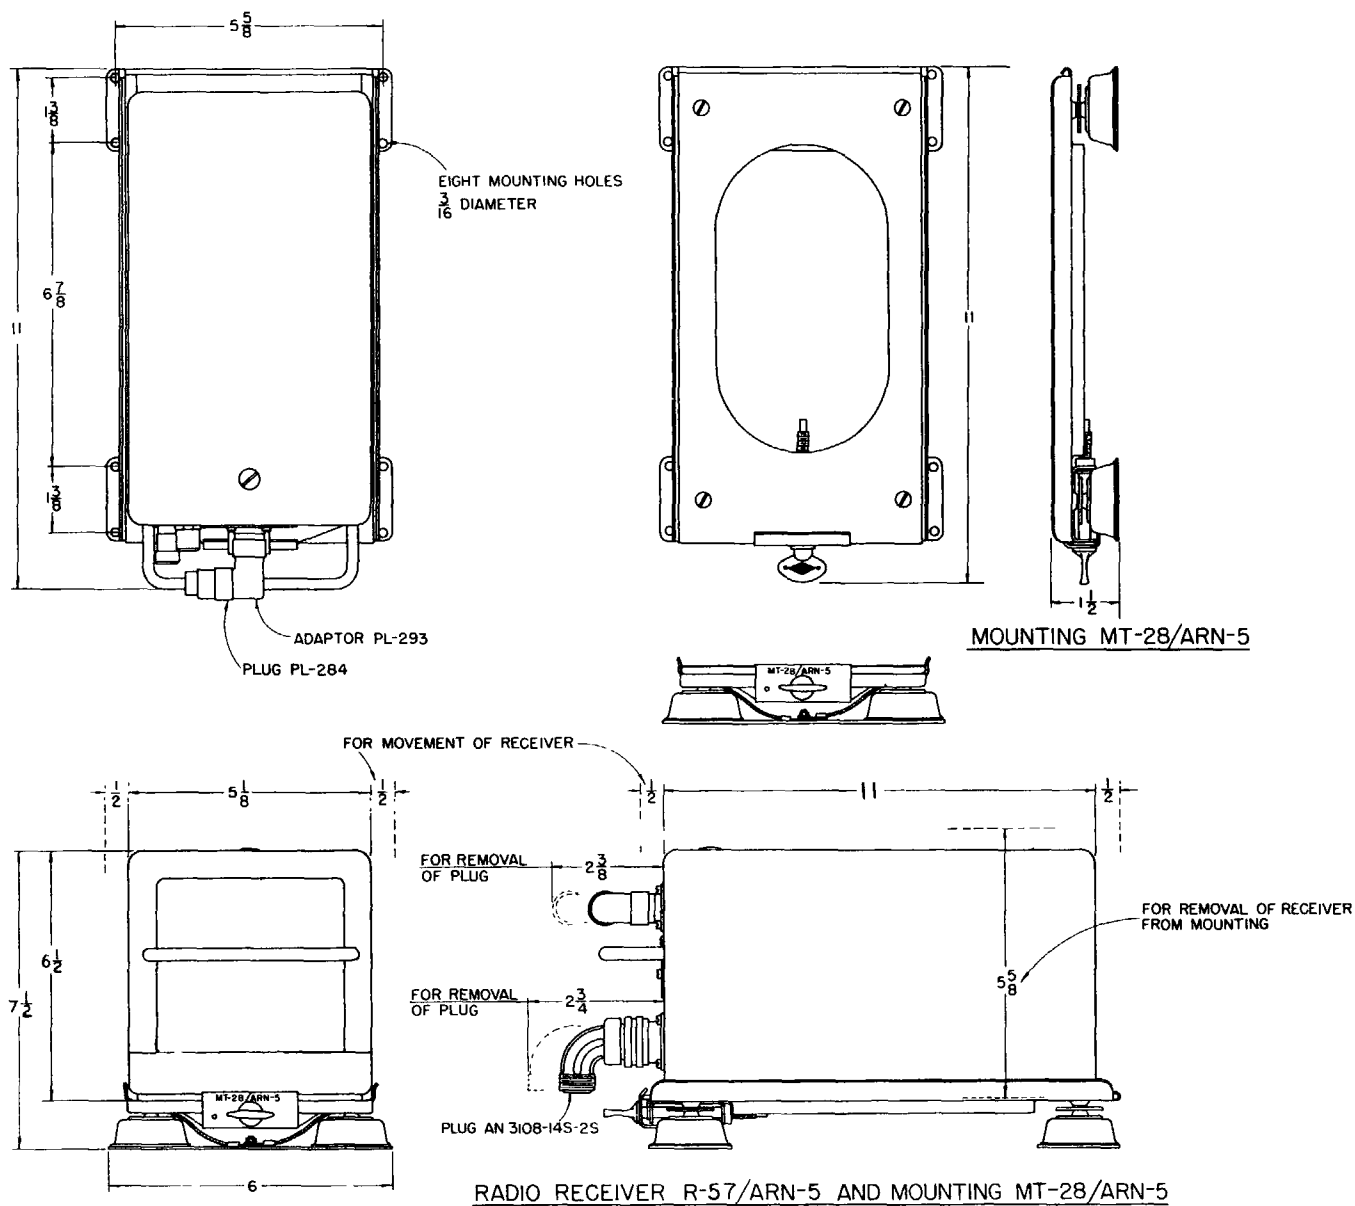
Radio Receiving Equipment AN/ARN-5—Outline Dimensional Drawing
